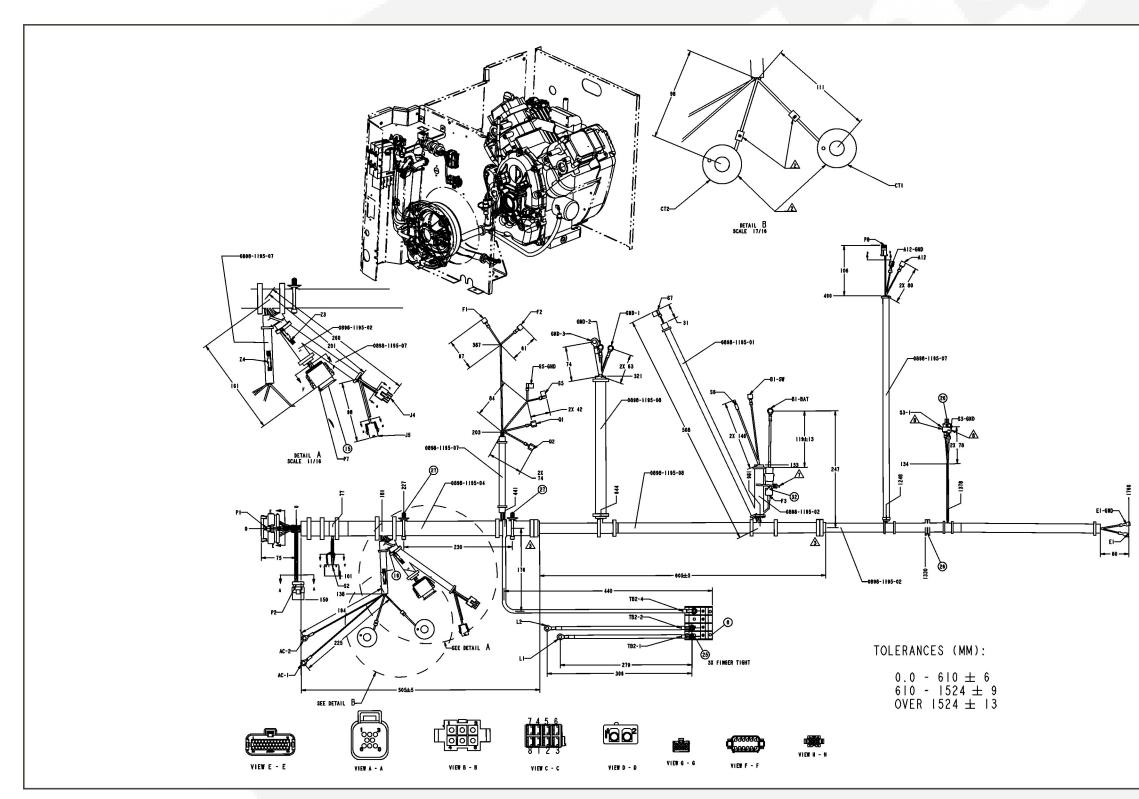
WIRING HARNESS CONNECTIONS (SHEET 4 OF 4)
